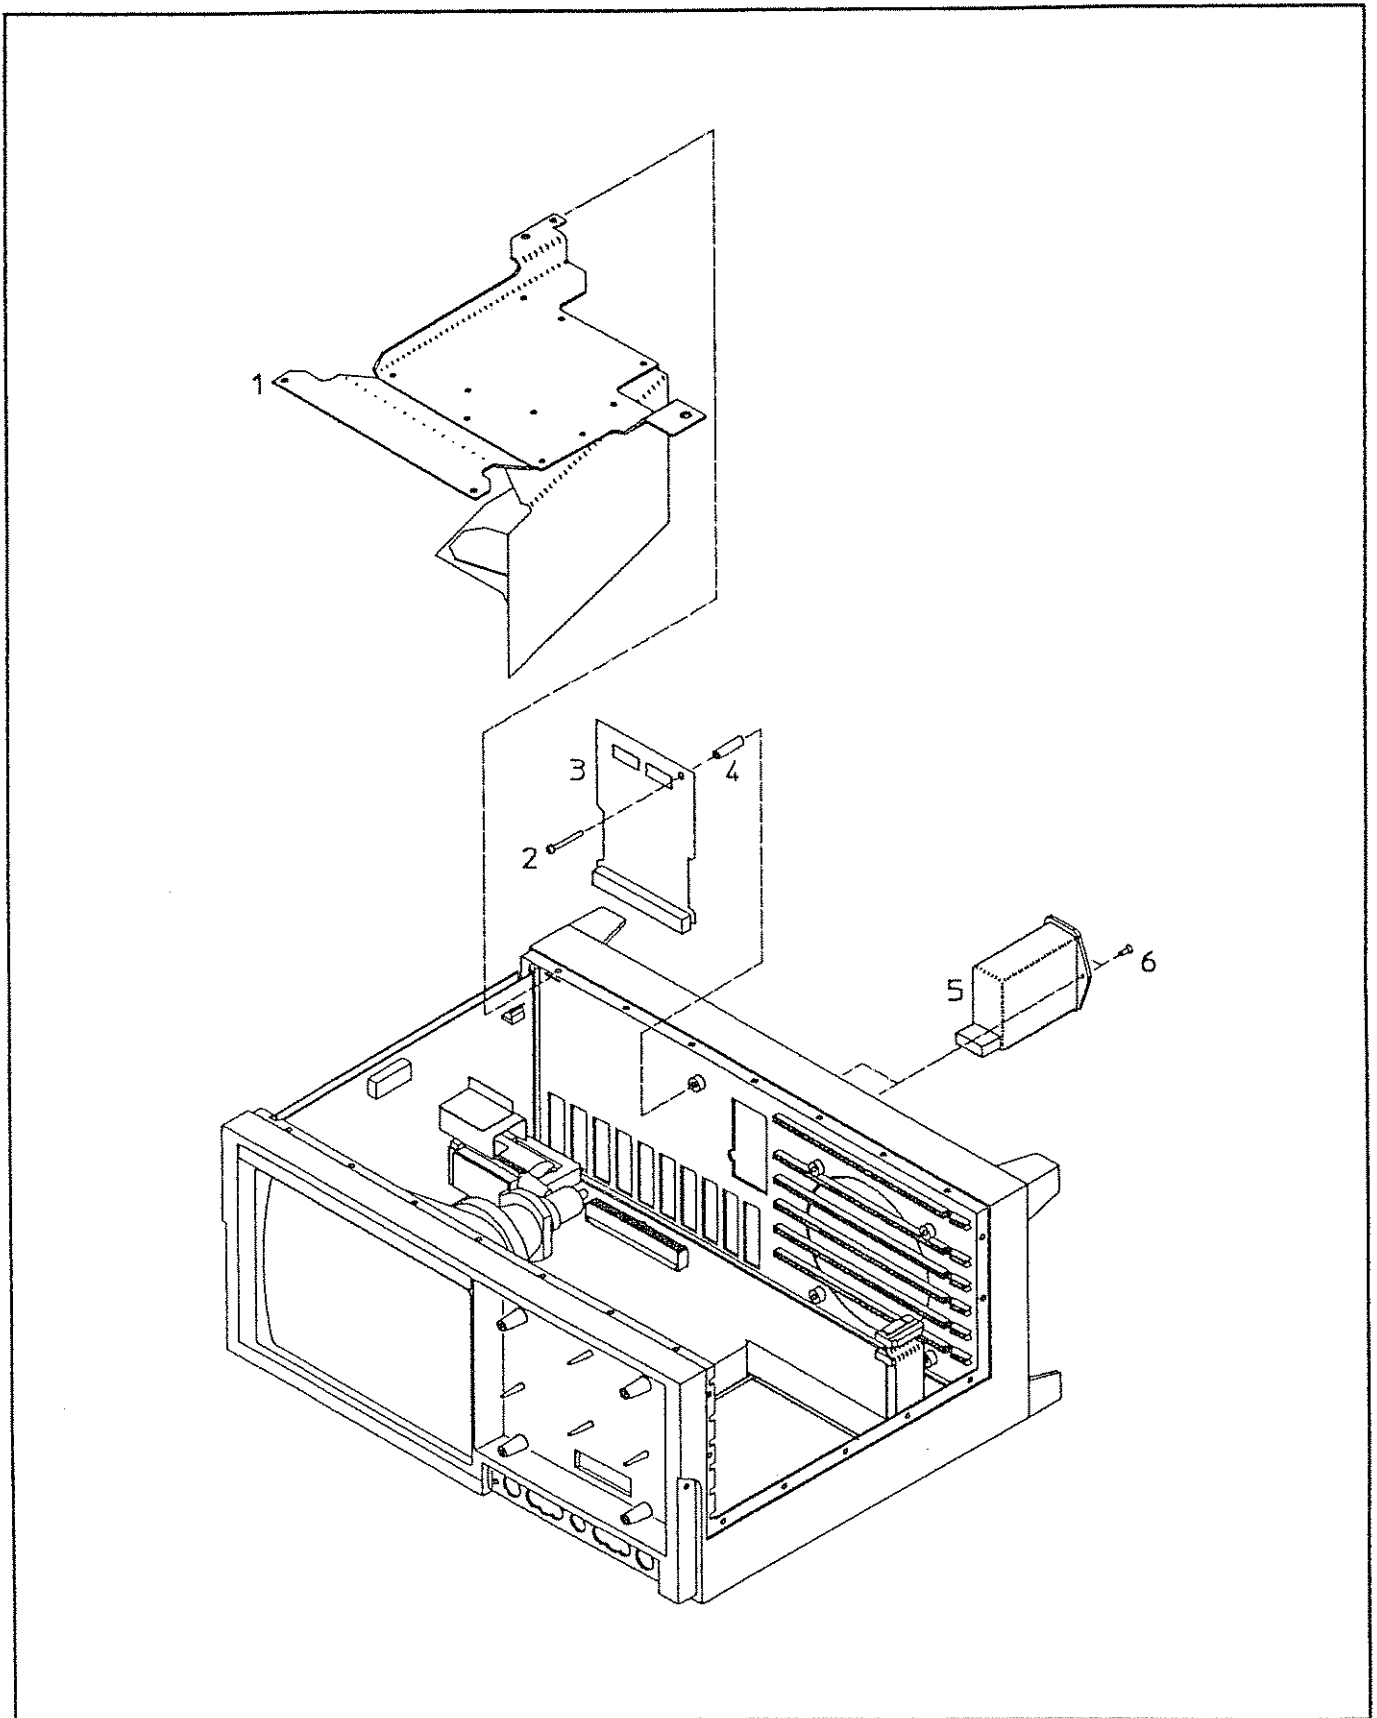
CRT Shield, Memory Board, and Line Module Illustrated Parts Breakdown
